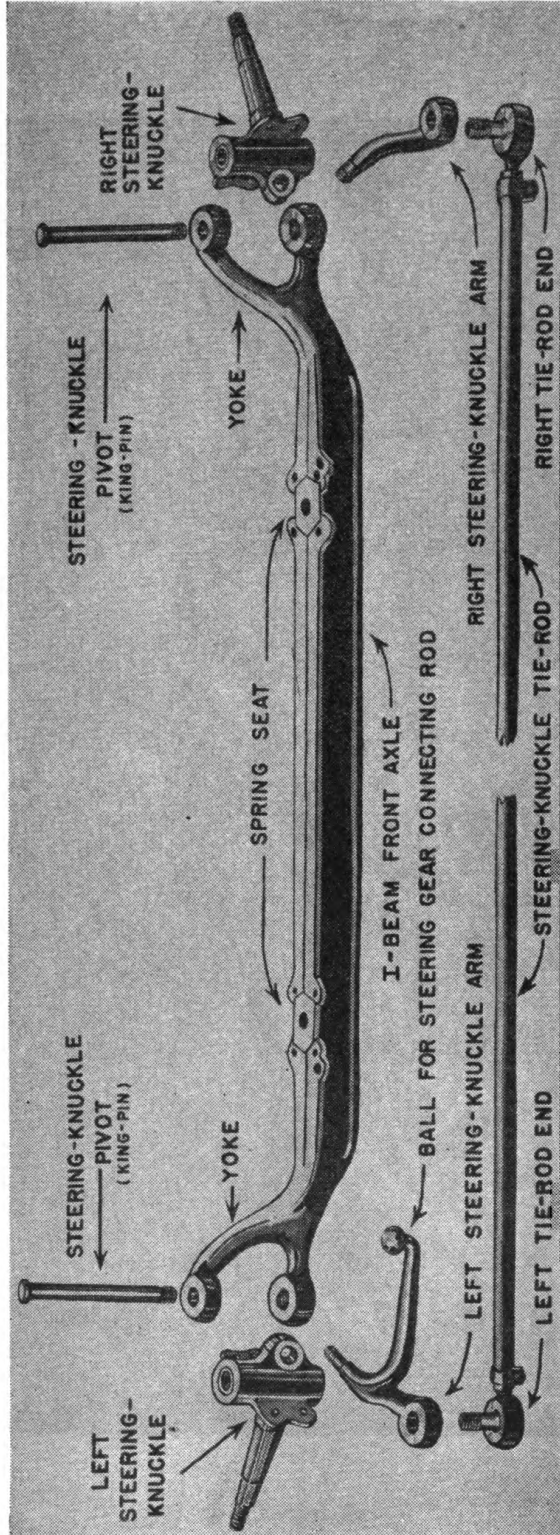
An I-beam type front axle (dead, nondriving) and attached steering parts.
